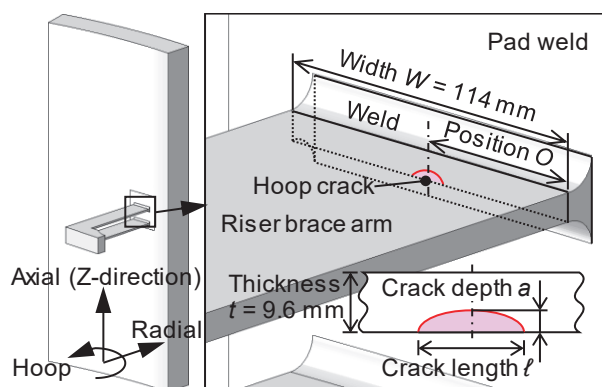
Assumed fatigue crack in riser brace arm weld
